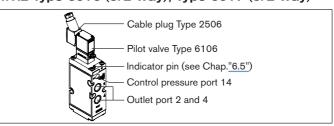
Valve structure Type 6516/6517 (in the example Type 6517)
